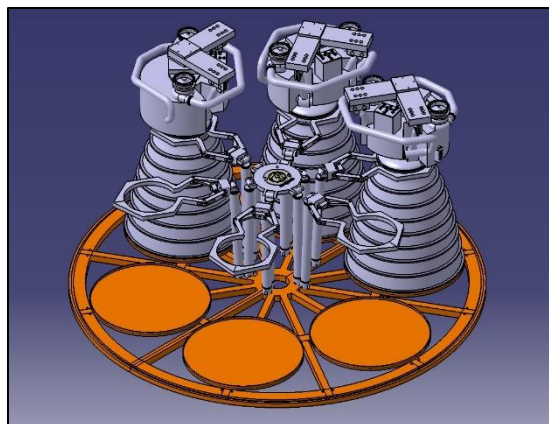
Three RS-25 Positioned on the Circular Fixture Base Plate with Holding Arm
